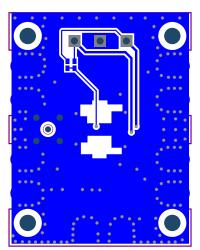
ZJA3100 Evaluation Board Layout (Bottom Layer)
